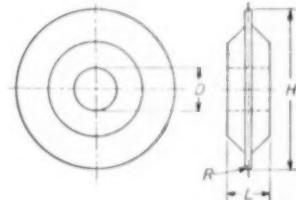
Sketch of Plain Circular Roller Tool. Radius (R) at the periphery is the low limit of the fillet radius tolerance. The major diameter (H) is about 2 in.; width (L) and hole diameter (D) are about 1/2 in.
